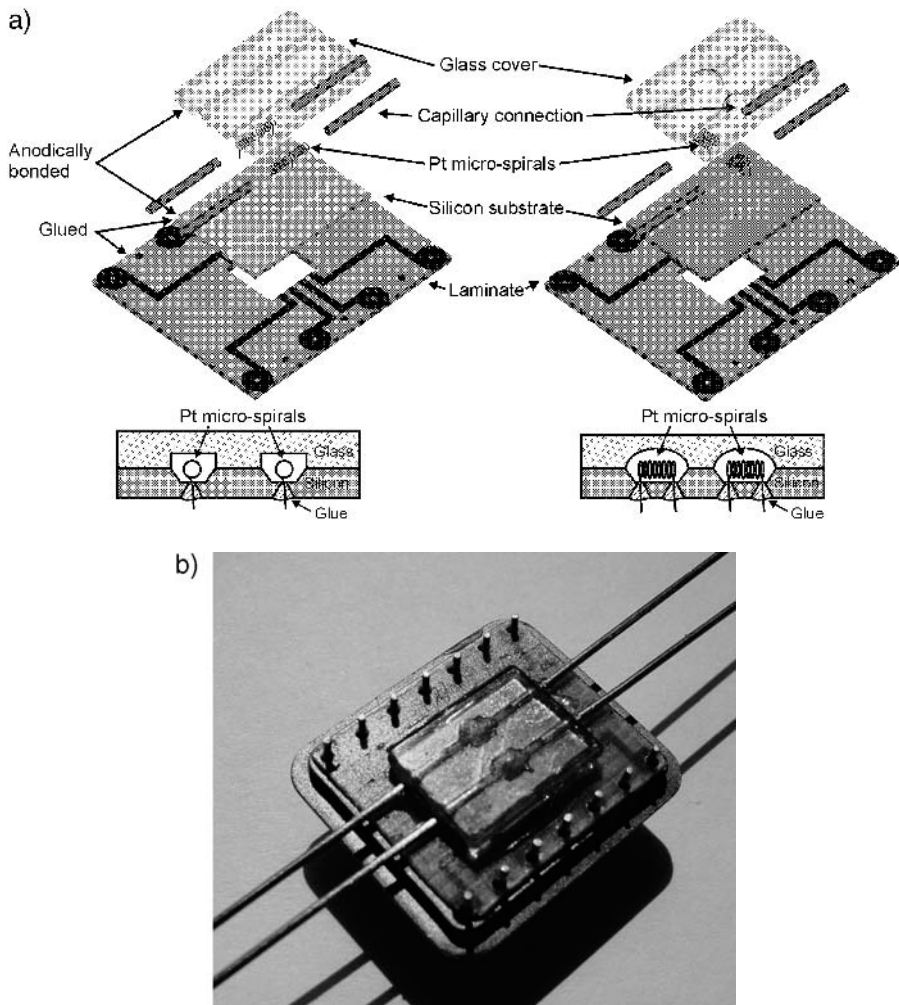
TCD with spirals: a) expanded view and cross-section of the packaged sensor, b) the finished TCD.
